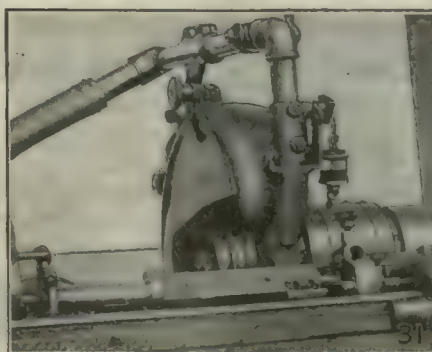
GRINDING OUTSIDE OF BORING TOOL
